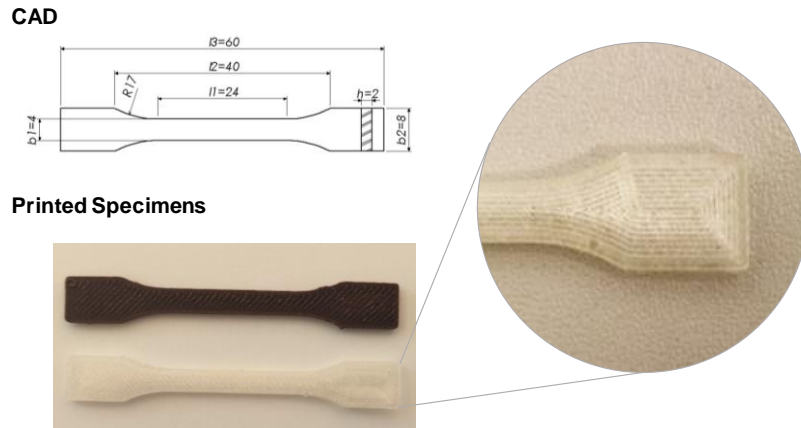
Specimens' dimensions. The zoom image focuses the concentric infill pattern used.
